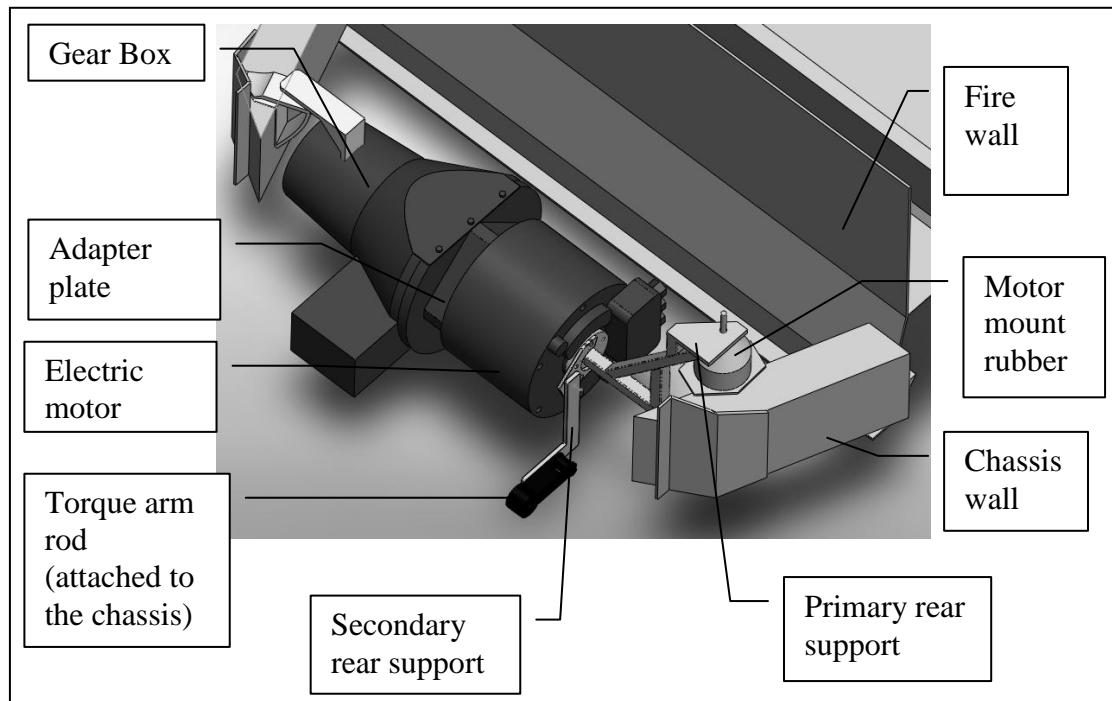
The final design of motor mounts inside Lotus Elise engine compartment
